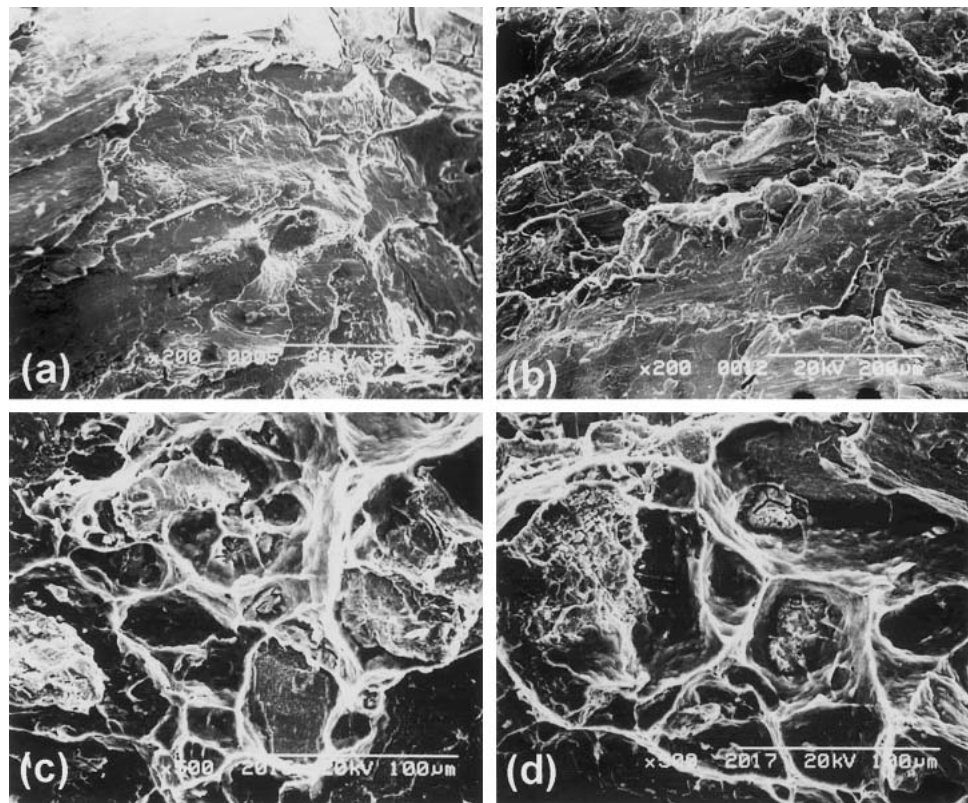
Fracture surfaces of joint after the peel test (Weld No. 7). (a) Brittle morphology on the aluminum side. (b) Brittle morphology on the steel side. (c) Ductile morphology on the aluminum side. (d) Ductile morphology on the steel side
